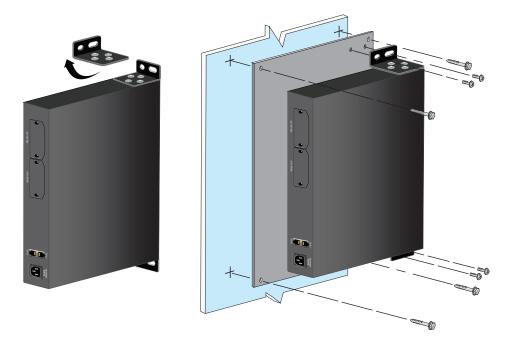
Wall Mounting the NetVanta 3450 and NetVanta 3458
